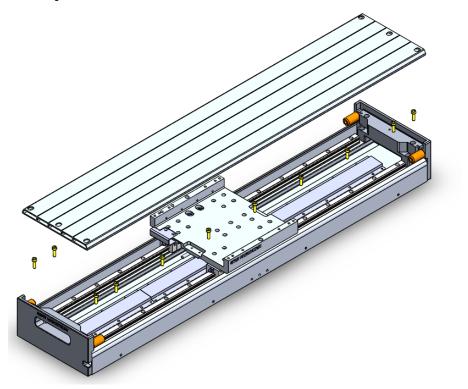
Assembling the linear motor system – here for LMSSA-18/20 Dust-proof type linear motor stages
